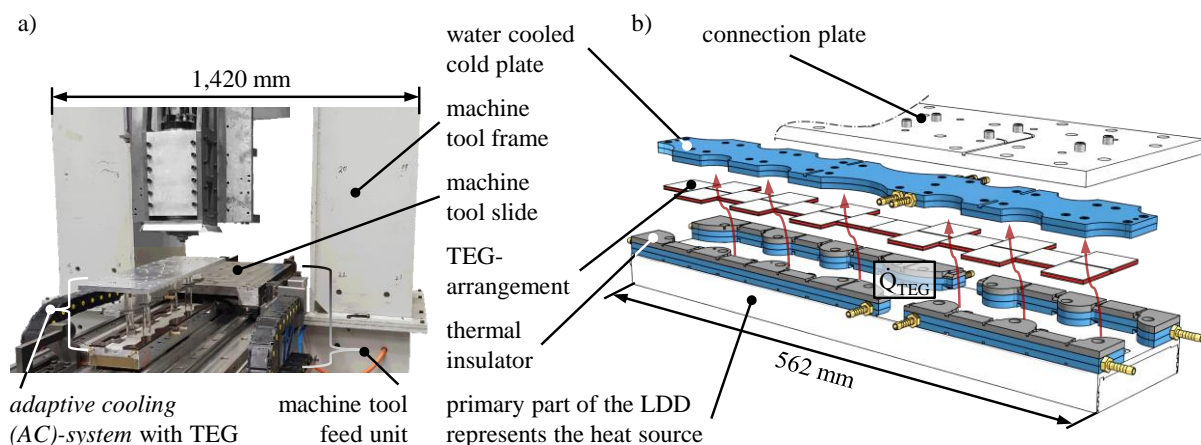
AC-system* with TEG; a) prototypical integration in a machine tool demonstrator with LDD; b) exploded view of the design
